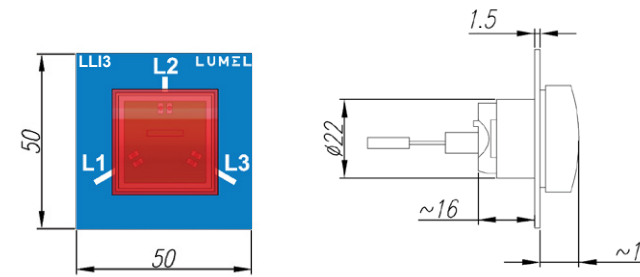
Dimensions and installation method of external Live Line Indicator LLI3
